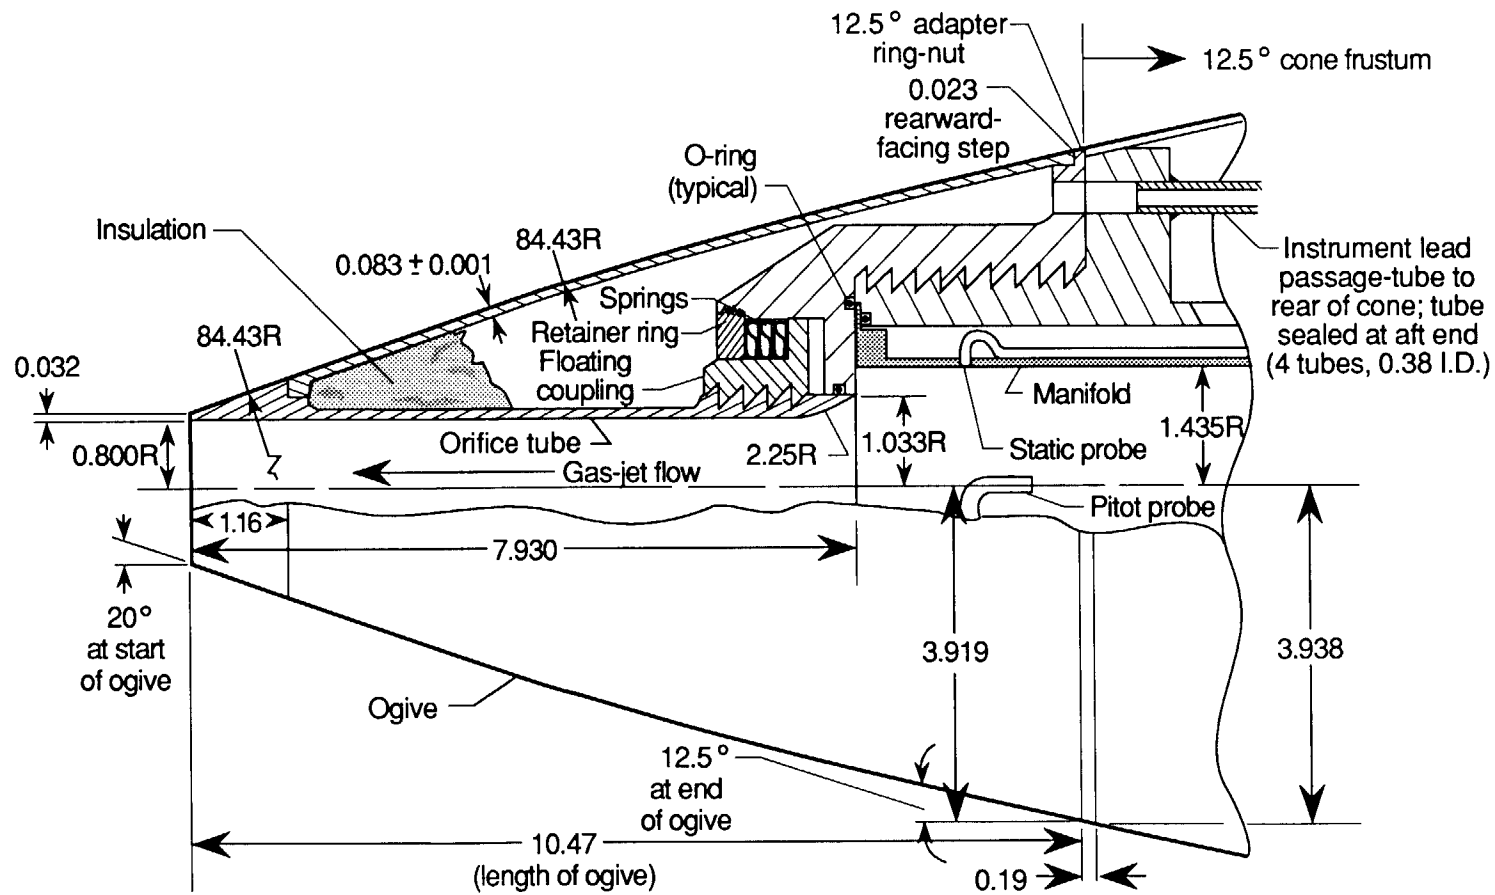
Schematic drawing of gas-jet nose. Linear dimensions are in inches.
